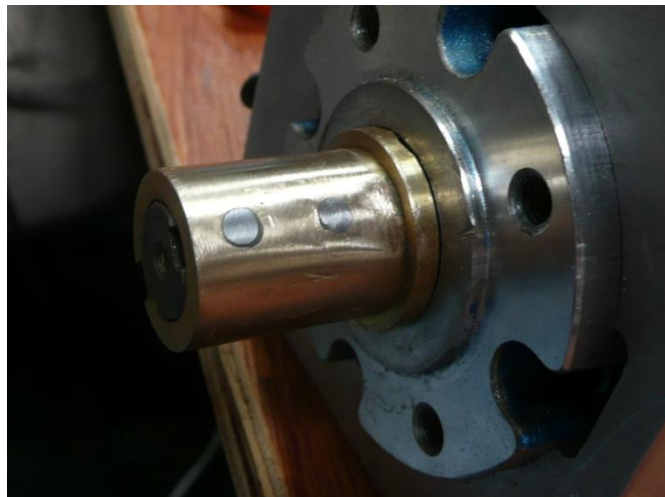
Parvalux gearbox output shaft with grub screw replaced
